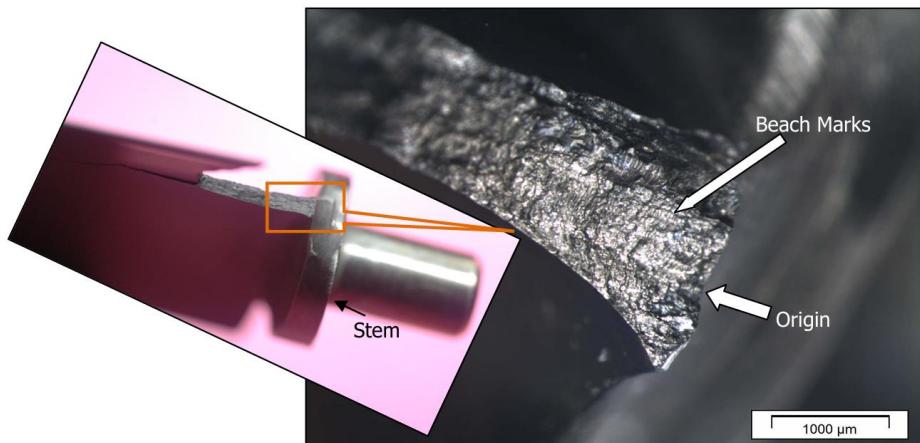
Beach marks (vertical fracture on the surface) and crack come exit indicating broken surface
